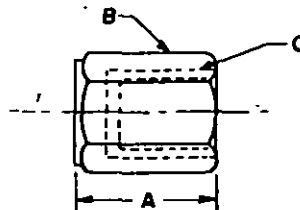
Type XIII, class 5, puller adapter, mechanical, gear and bearing, leg cap.
